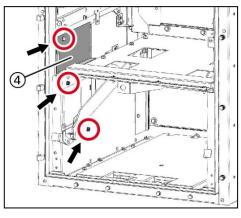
3 bolted joints on wiring duct cover, panel width 800 mm
